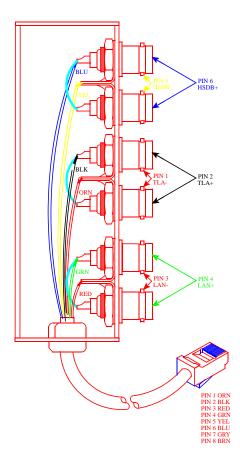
RJ-11 TO BNC ADAPTER MODULE
